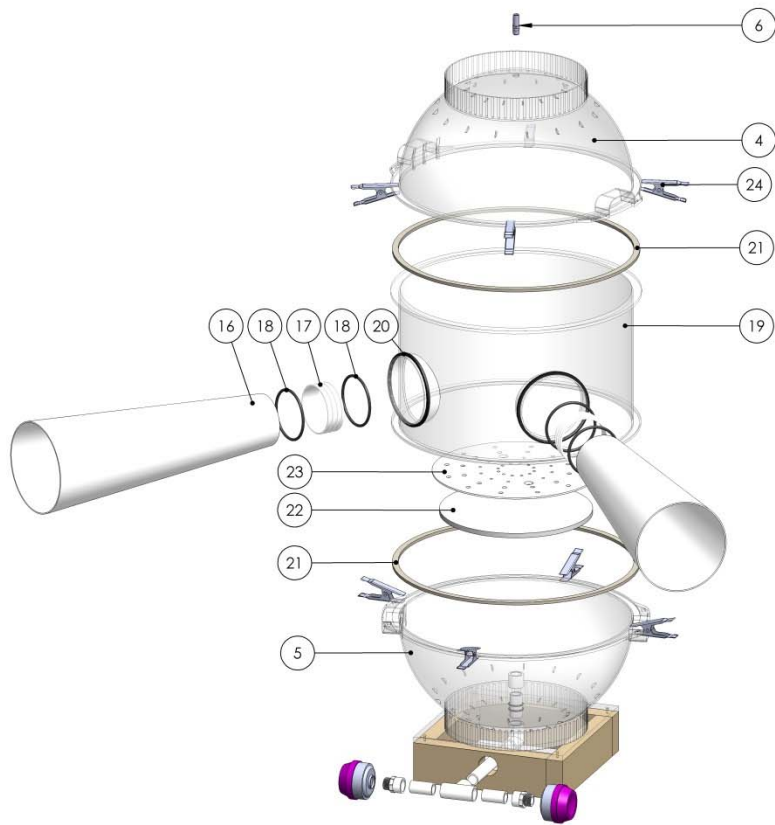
Environmental test chamber parts and assembly (gloves not pictured). (Graphic Credit: NIOSH)
